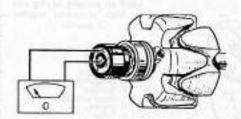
View showing proper connection of chammeter (O) to stip ring for resistance check. Refer to paragraph 188.
